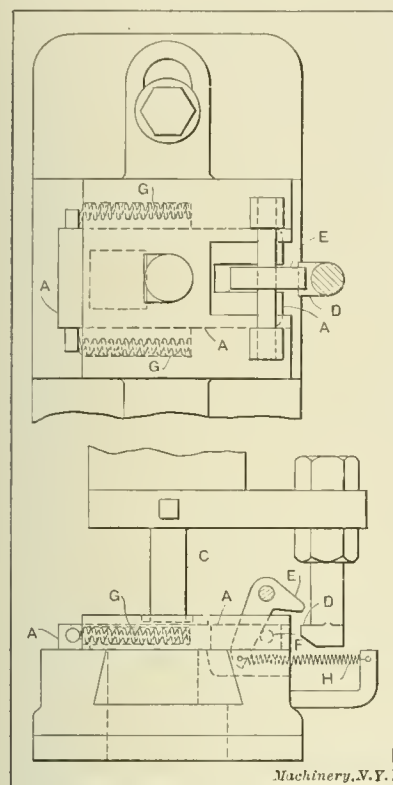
Plan and Side Elevation of the Stamping Punch and Die
